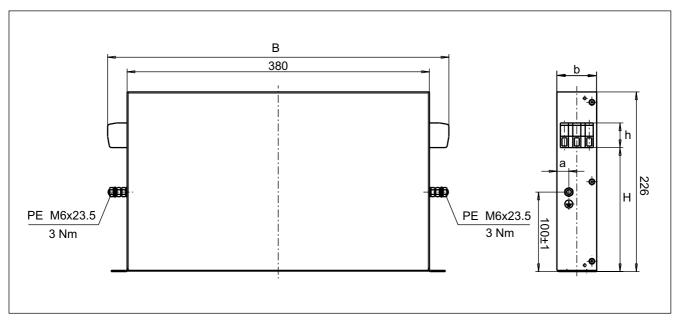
Dimension drawing: Basic Line Filter for Active Line Modules (16 kW to 55 kW)
